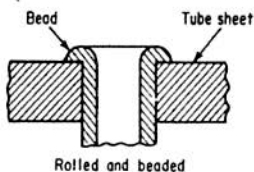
Rolled and beaded tube for fire-tube boiler.
